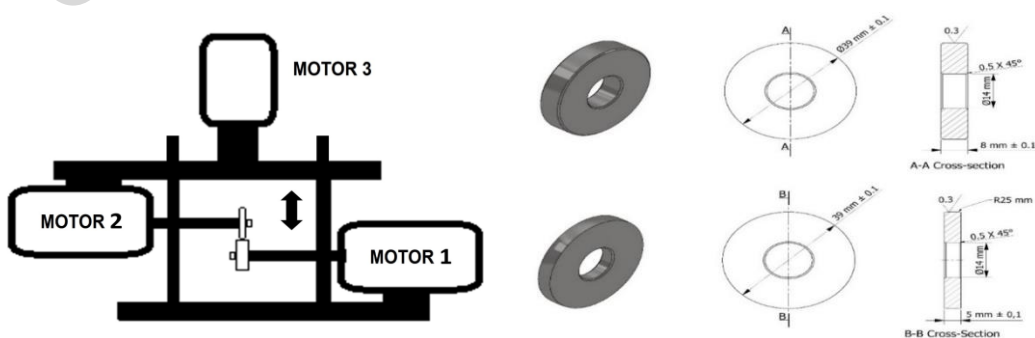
(a) Schematic drawing of the twin-disc wear machine. (b) Dimension in millimeter of the discs used in the twin-tribometer.
